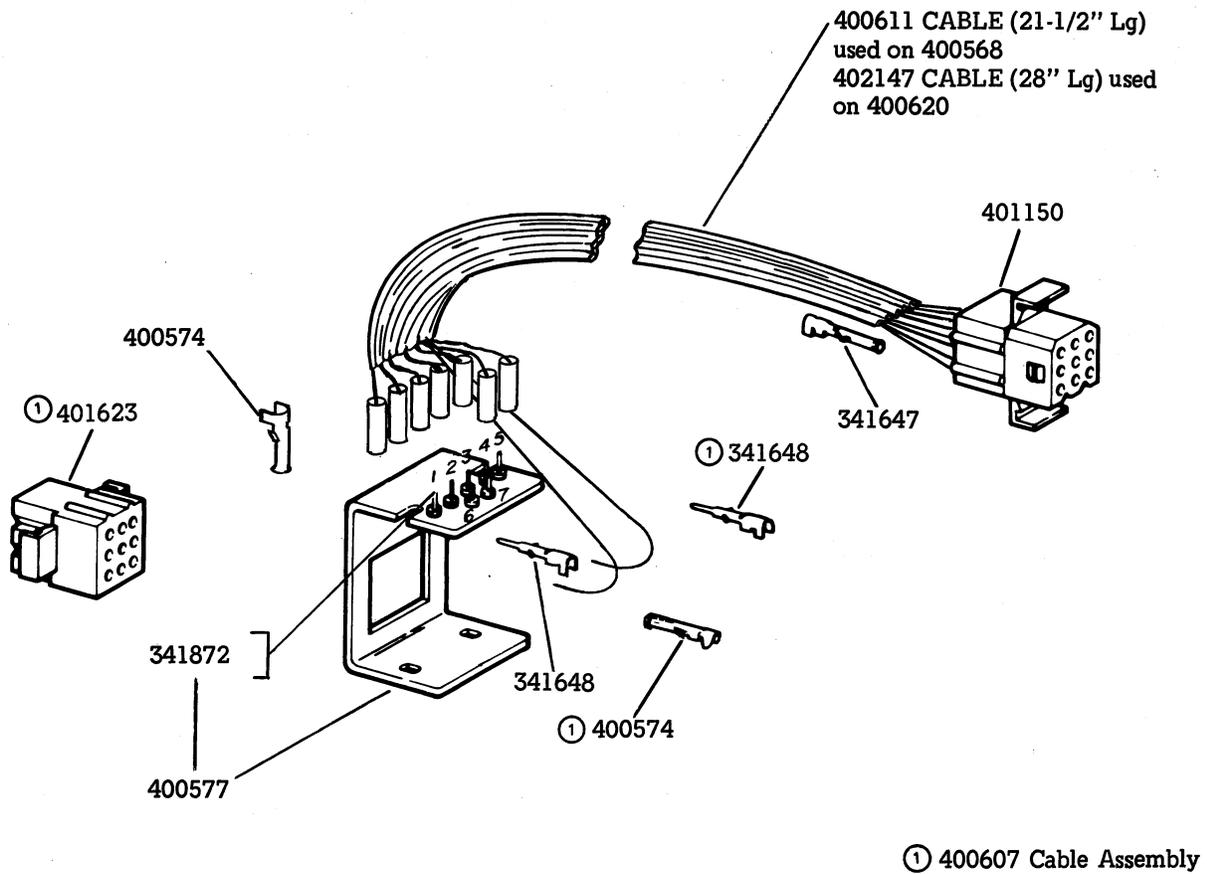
400568 Cable Assembly (Opcon) for RO Friction Feed Printer Cabinet
